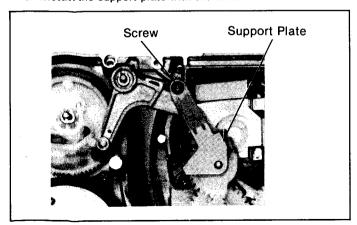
Assembly and Adjustment of Gears and Rod-(5)
